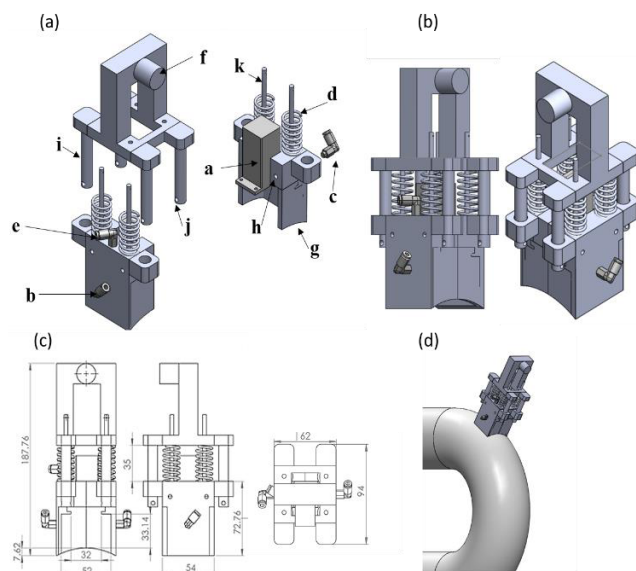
(a) Exploded view of the wedge design. (b) 3D- CAD model. (c) 2D schematics. (d) Probe holder placement on the chain surface.
